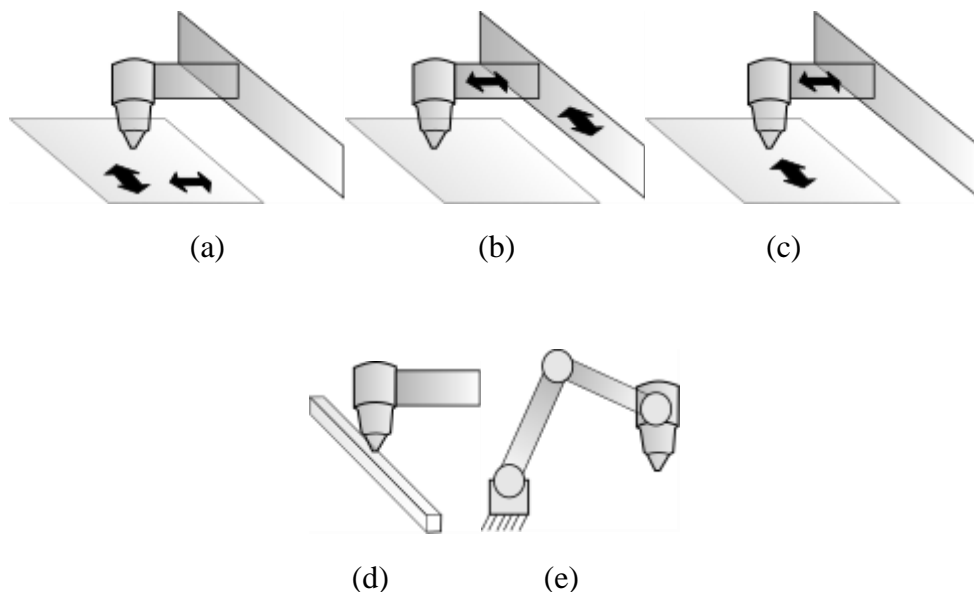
Laser cutting machine configurations (a) Moving material, (b) Flying optics (c) Hybrid, (d) Tube cutting, (e) Robotic cutting.
